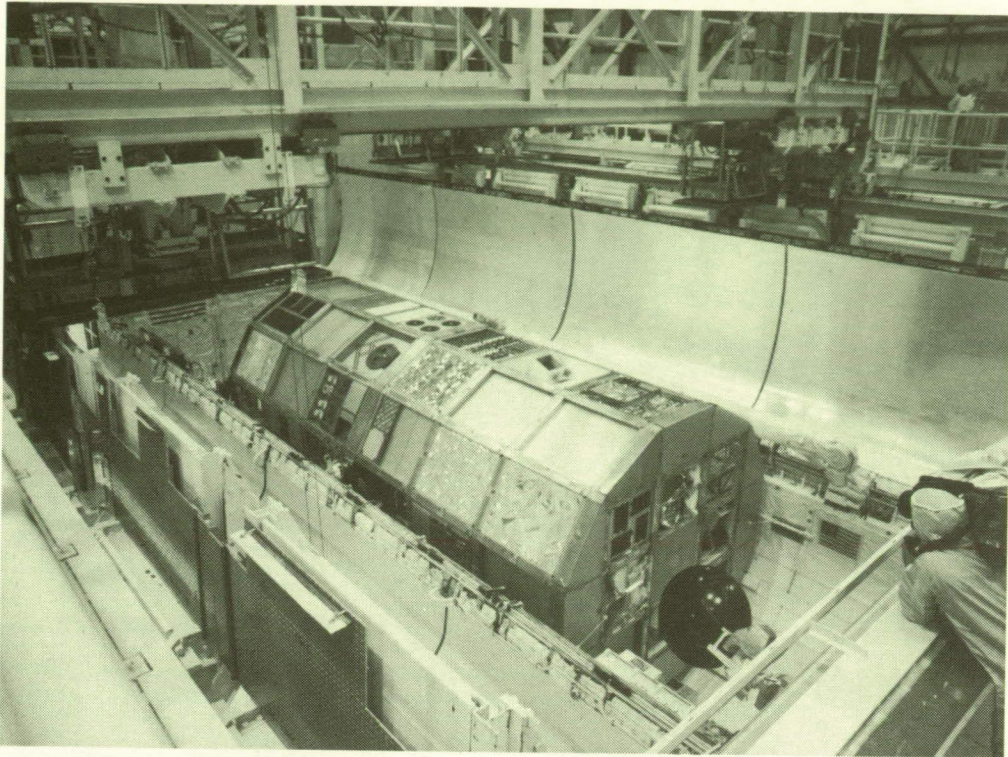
Payload bay doors being opened in Orbiter Processing Facility. (Photo L- 90-01079)
